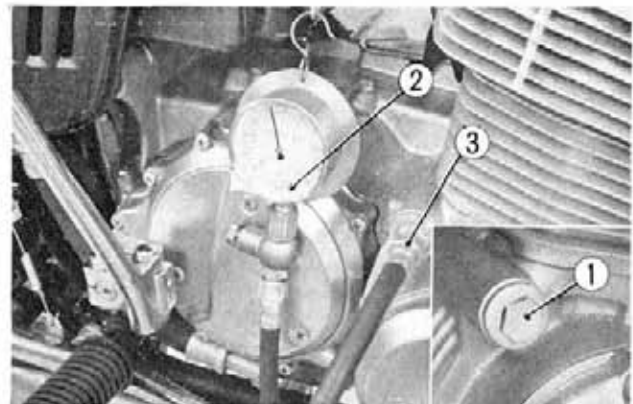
① Oil path cap ② Oil pressure gauge ③ Adapter
